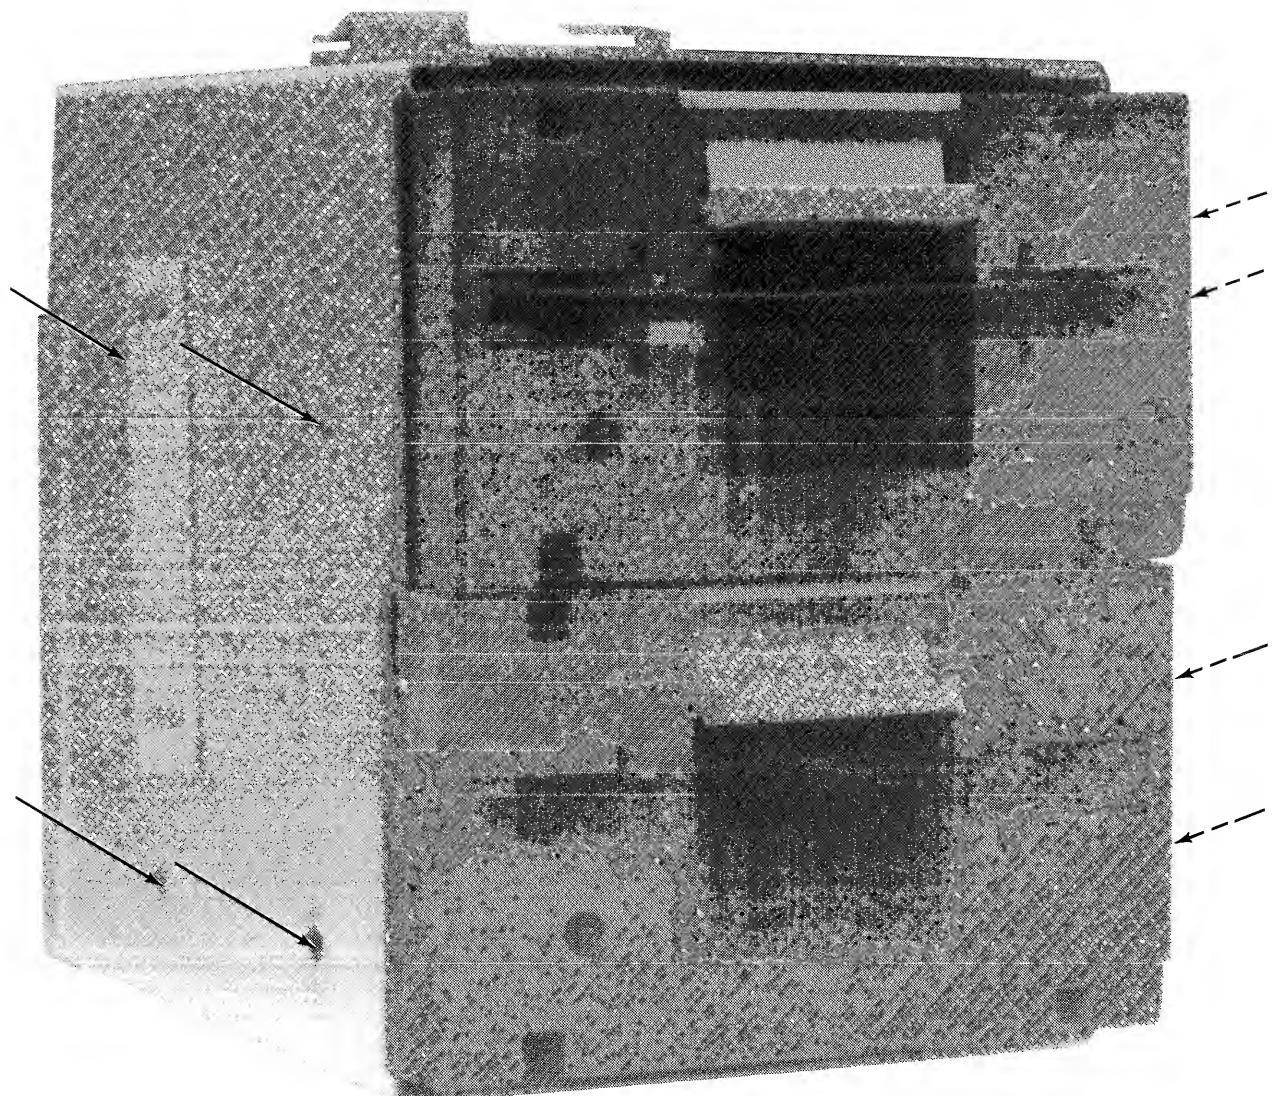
Mini Drive Mount Screw Locations on Shield Box
